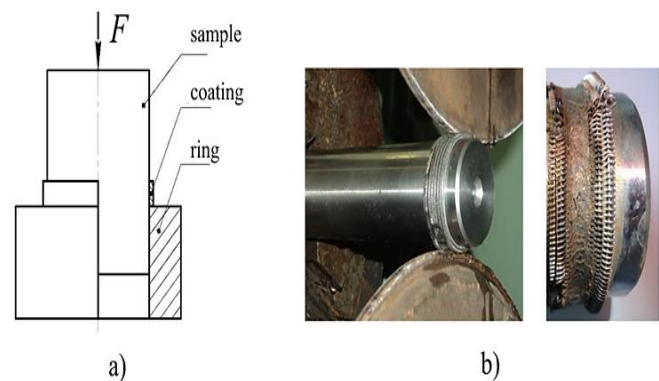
a) Scheme of the coating shearing test; b) Electro-contact welding of the steel gauze to samples for the strength adhesive testing.
